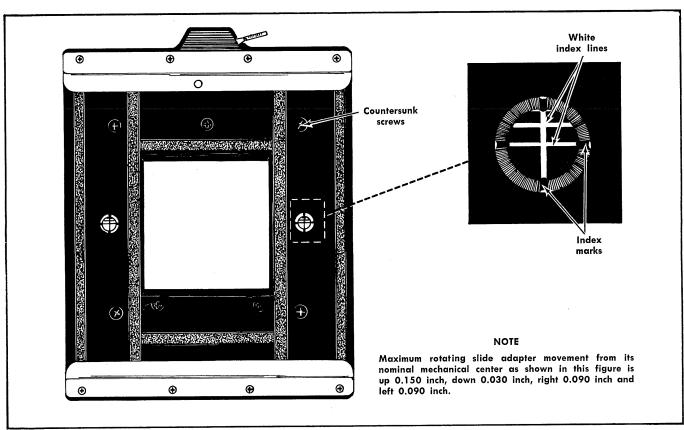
Adjustable Style Rotating Slide Adapter.
